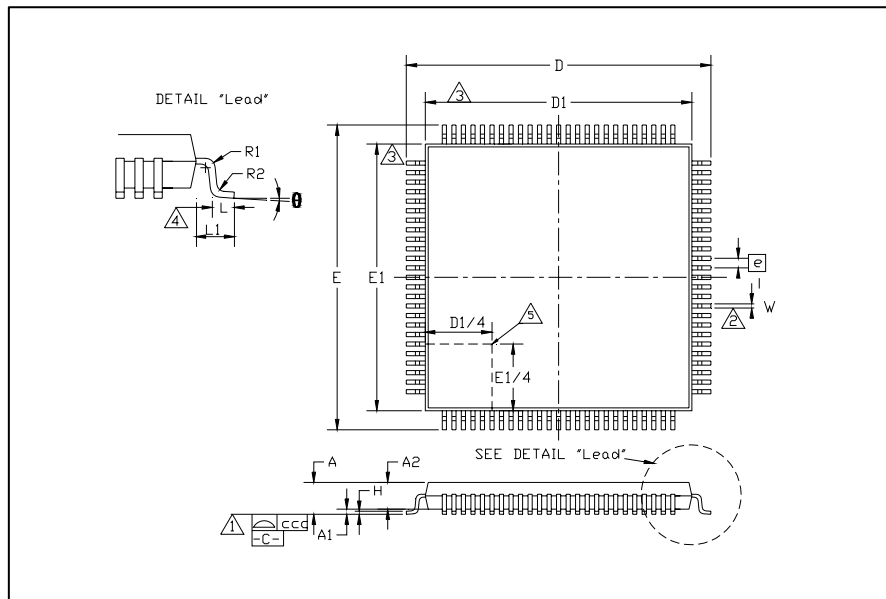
100 Pin TQFP Package Outline, 12x12x1.4 Body (Rev A)
